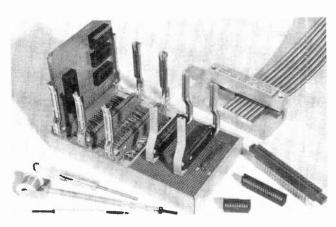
Typical plug-in card chassis. Three large sockets are Vector Electronics R644-3 with mating BR27-D card guides. Smaller connectors are R644-2 with BR27 card guides. Wire-forming and chiseling tools are also shown.
